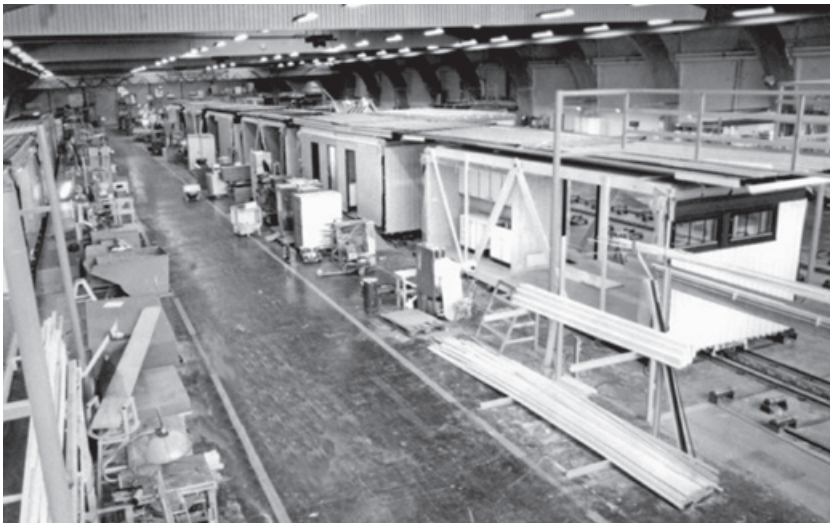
By the 1960s, Moelven production was based on a conveyor belt assembly. A photograph of the assembly line for Moelven "section"-houses. From *Moelven 1899-1999*.
